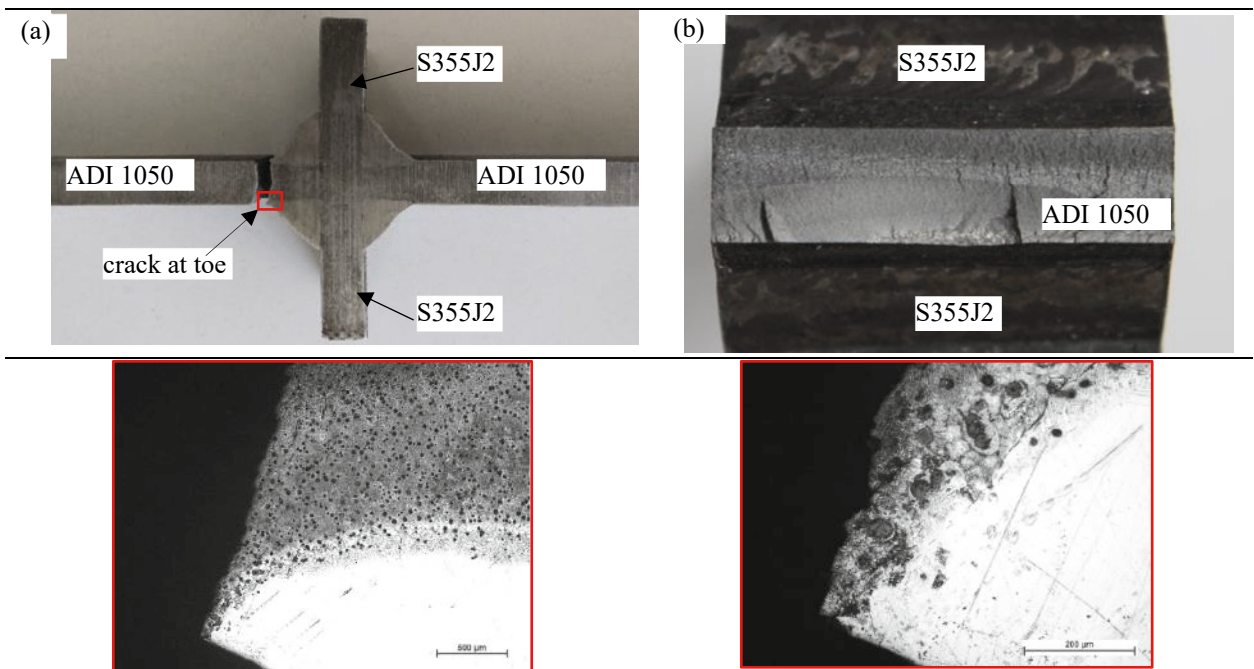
Fracture surfaces of full-penetration butt-joints tested under four-point-bending fatigue loading.
